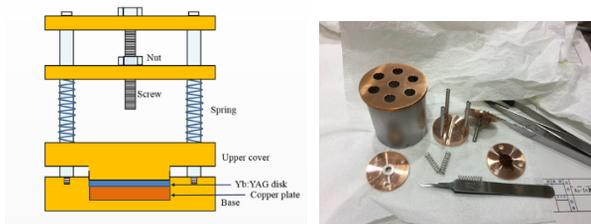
Configuration and components of fixtures for Au-Sn soldering.
